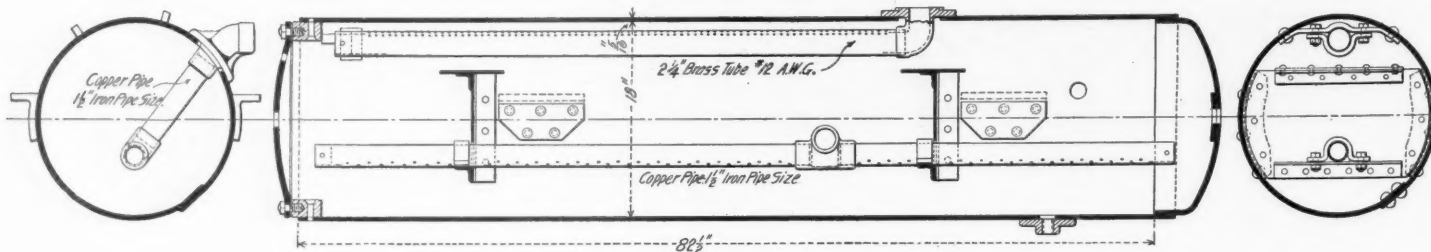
Heater for Compressed Air Motor Car—The Latest Design.
